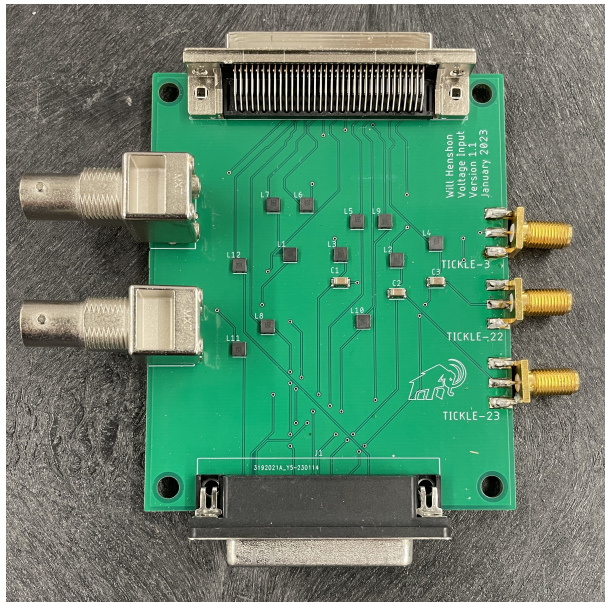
Fully built printed circuit board with components for the trap circuit. Dimensions of the board are 7.54 cm x 10.16 cm.
